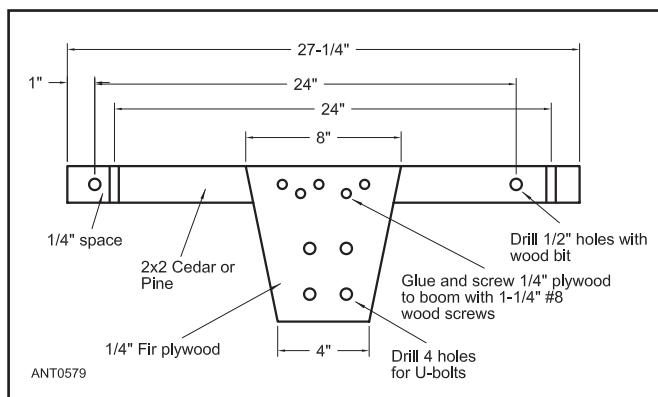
Dimensions for the boom-to-mast bracket of the 2-element 6 meter quad.
